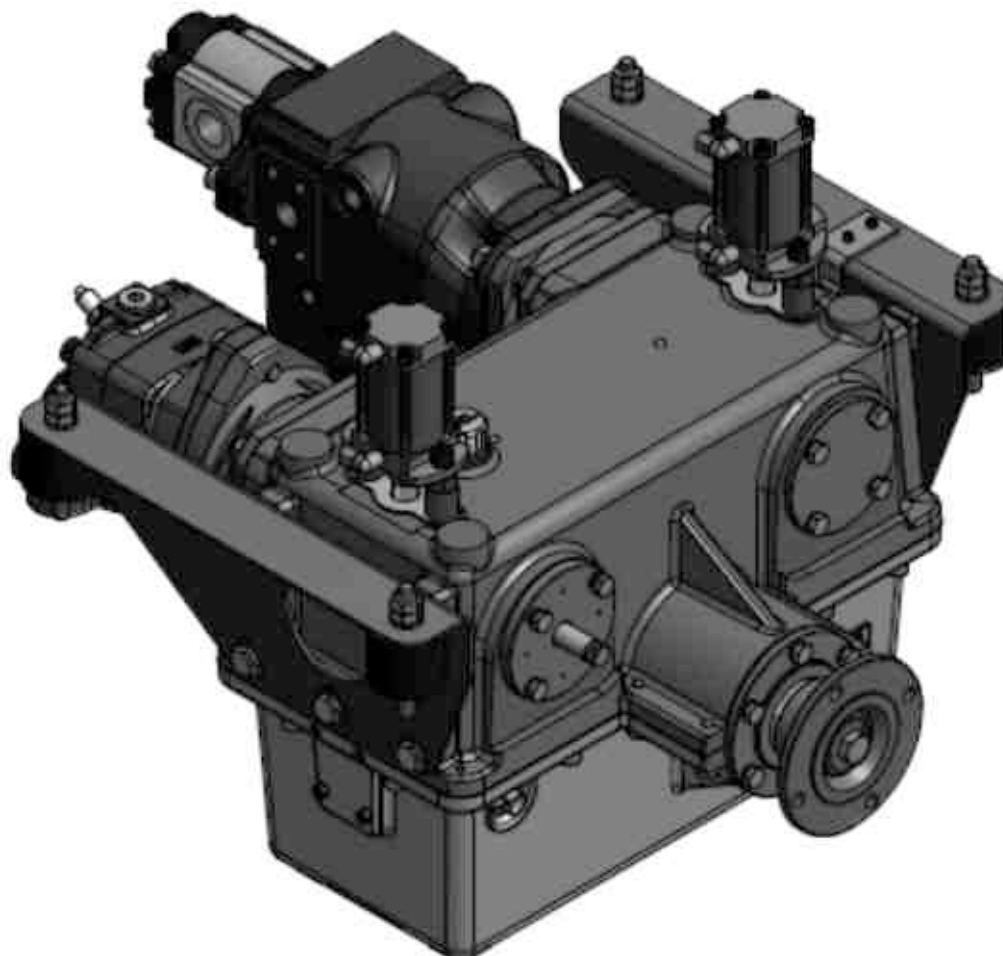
Mechanical-hydraulically combined driving gear box. The 3D Design Prototype
